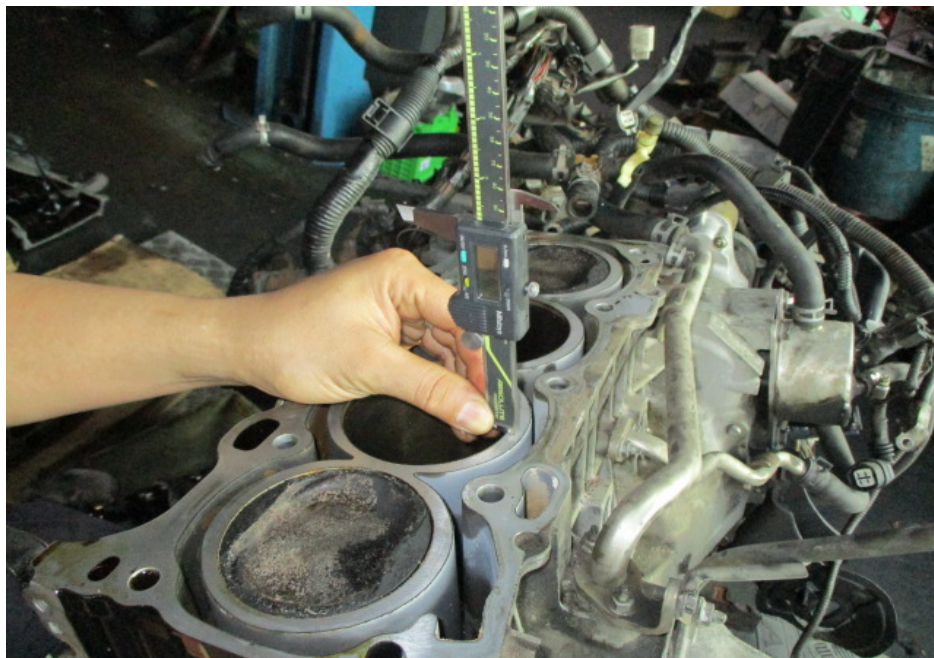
shows measurement being carried out to the stroke (arrowed) of cylinder 1 of the Toyota engine. The bore and stroke measurements of the Toyota engine were carried out using a digital Vernier Caliper that was calibrated before the start of the measurements.
